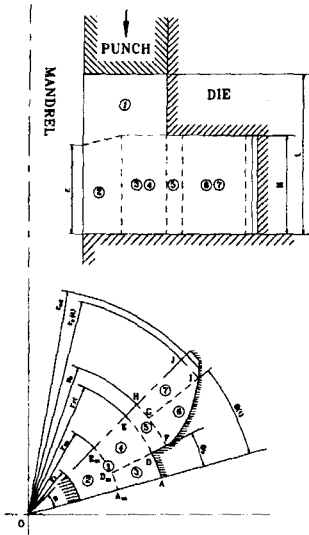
Assumed deformation zones during clamping type forging of a spur gear
